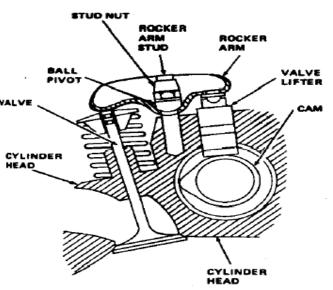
6 Valve train for an OHC engine using a rocker arm. The valve-train clearance is adjustable by turning the nut on the rocker-arm stud.
